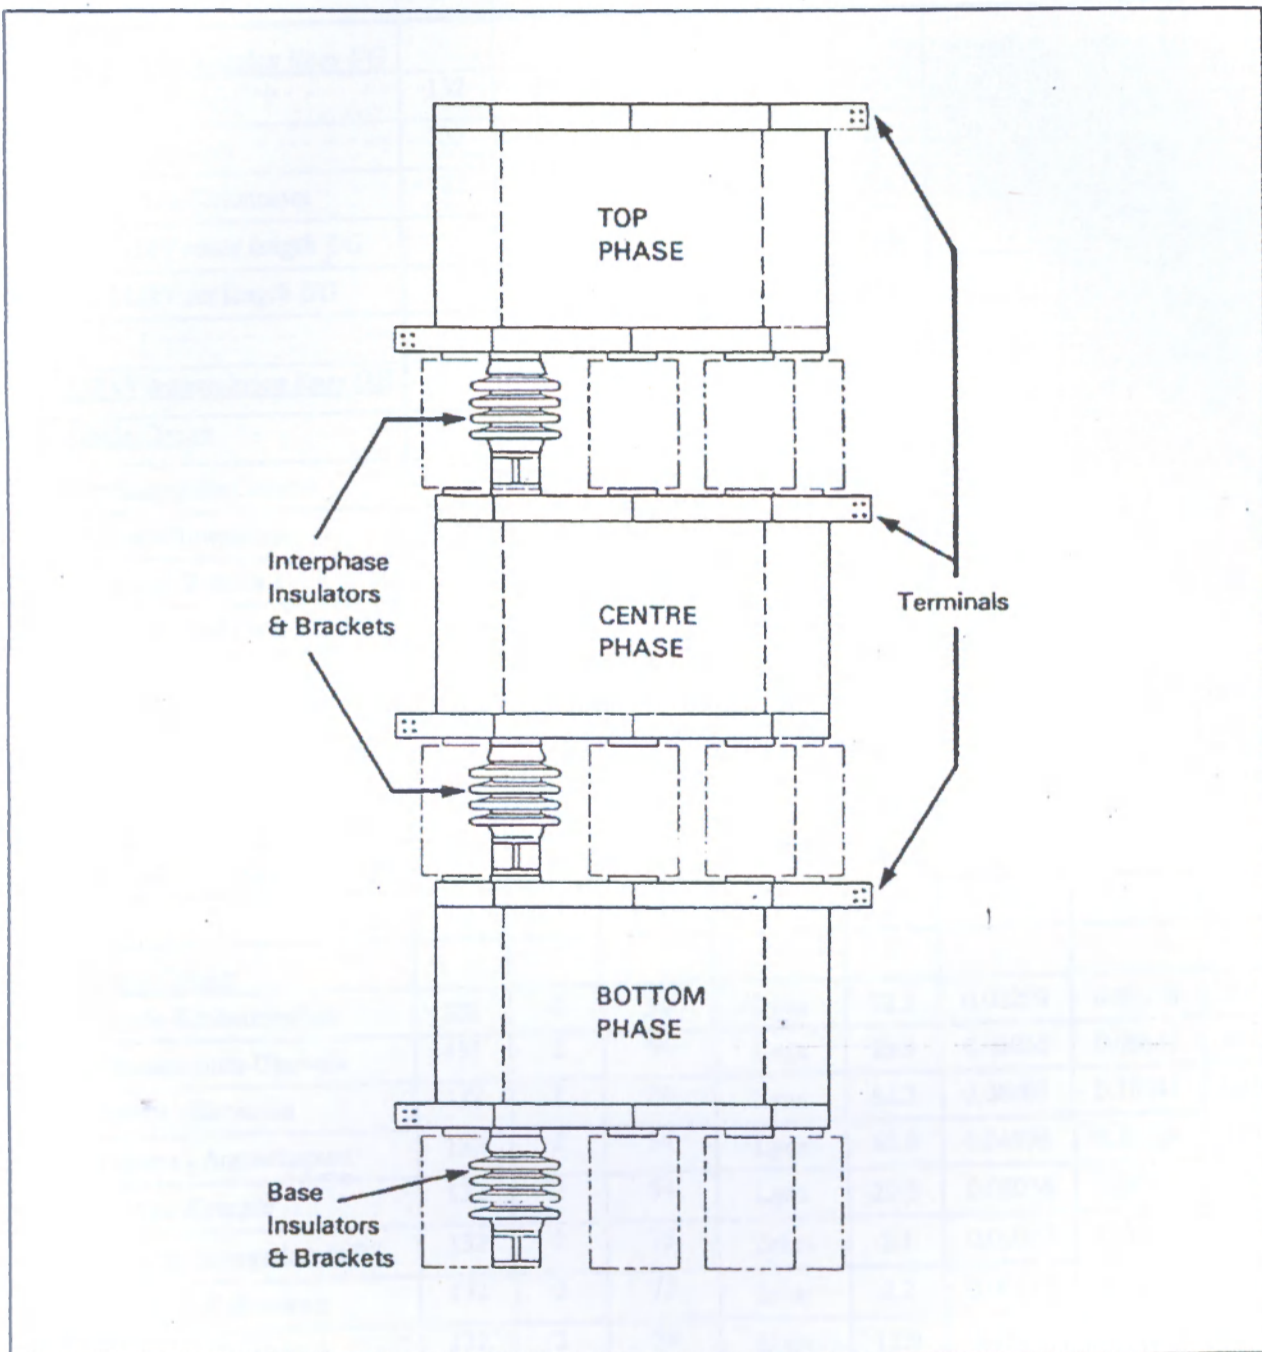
D Side View of Typical Three Phase Stacked Reactor after Assembly, Showing Arrangement of Coils, Insulators and Brackets
